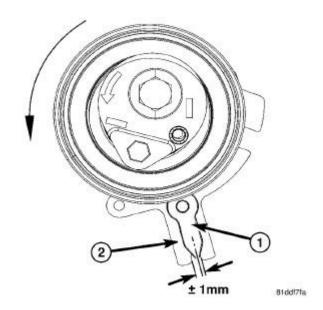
Identifying Tensioner Indicator & Tensioner Gage Slot Courtesy of CHRYSLER LLC
